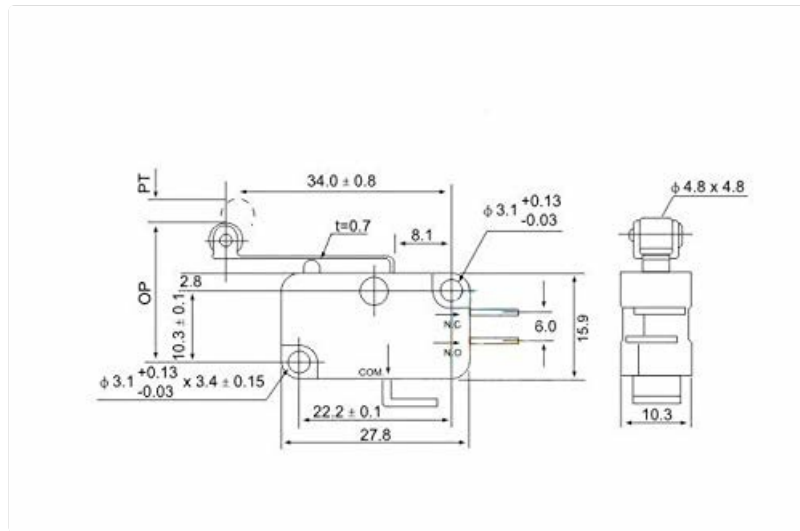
Technical drawing illustrating the dimensions and contact layout of the micro limit switch.
